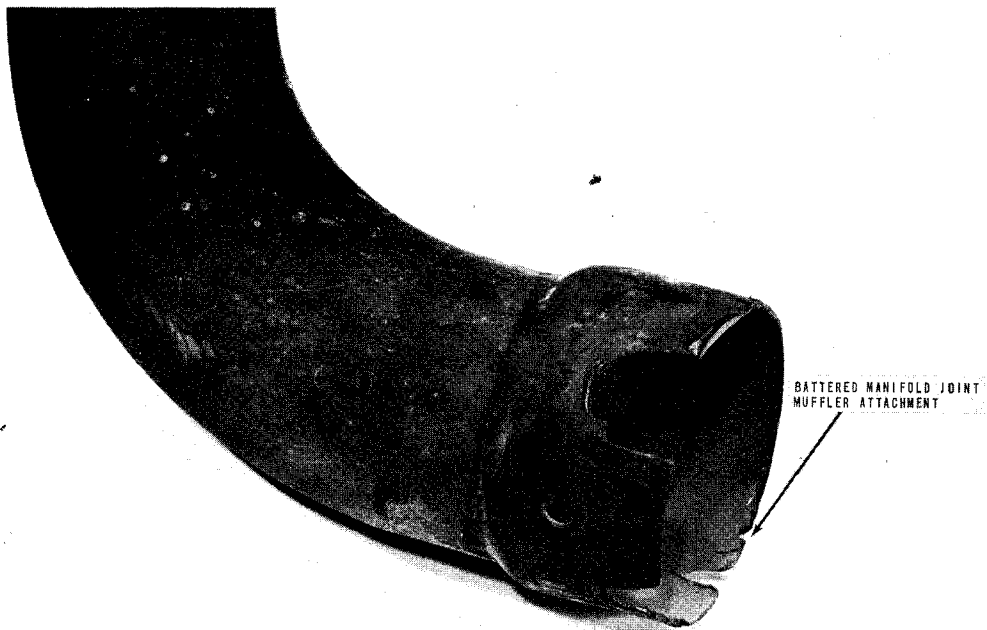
BATTERED MUFFLER AND MANIFOLD JOINT
